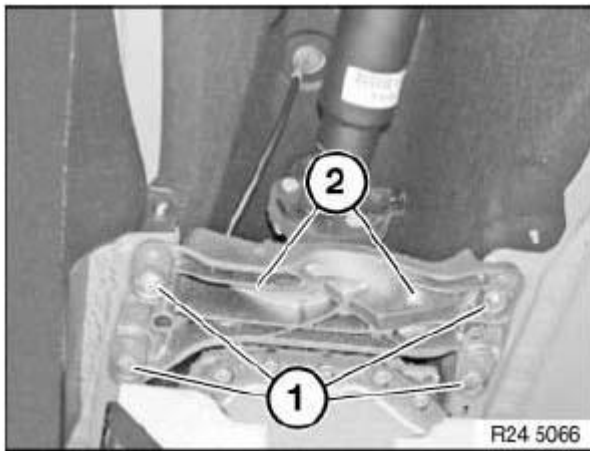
Identifying Transmission Crossmember Screws And Nuts
